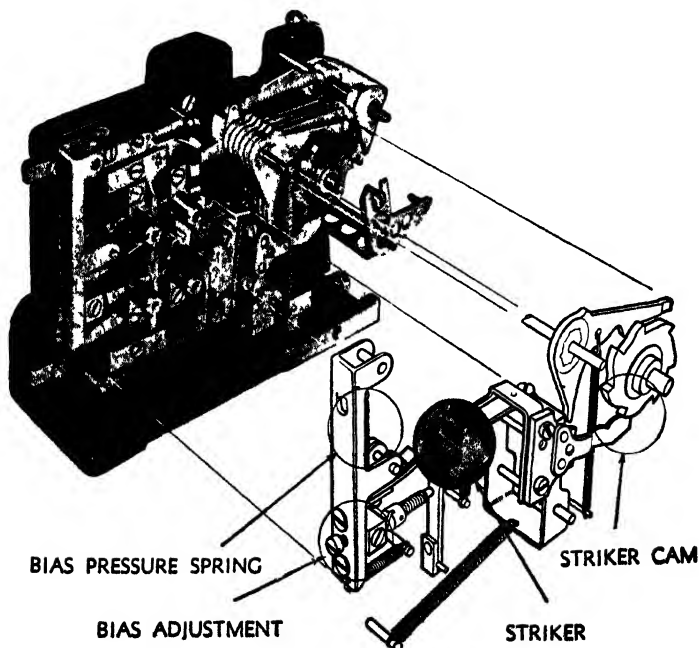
THE STRIKER TYPE TRANSMITTING CAM SLEEVE ASSEMBLY.
